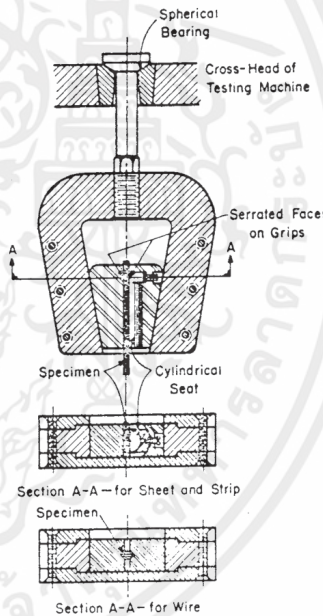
Gripping Devices for Sheet and Wire Specimens
